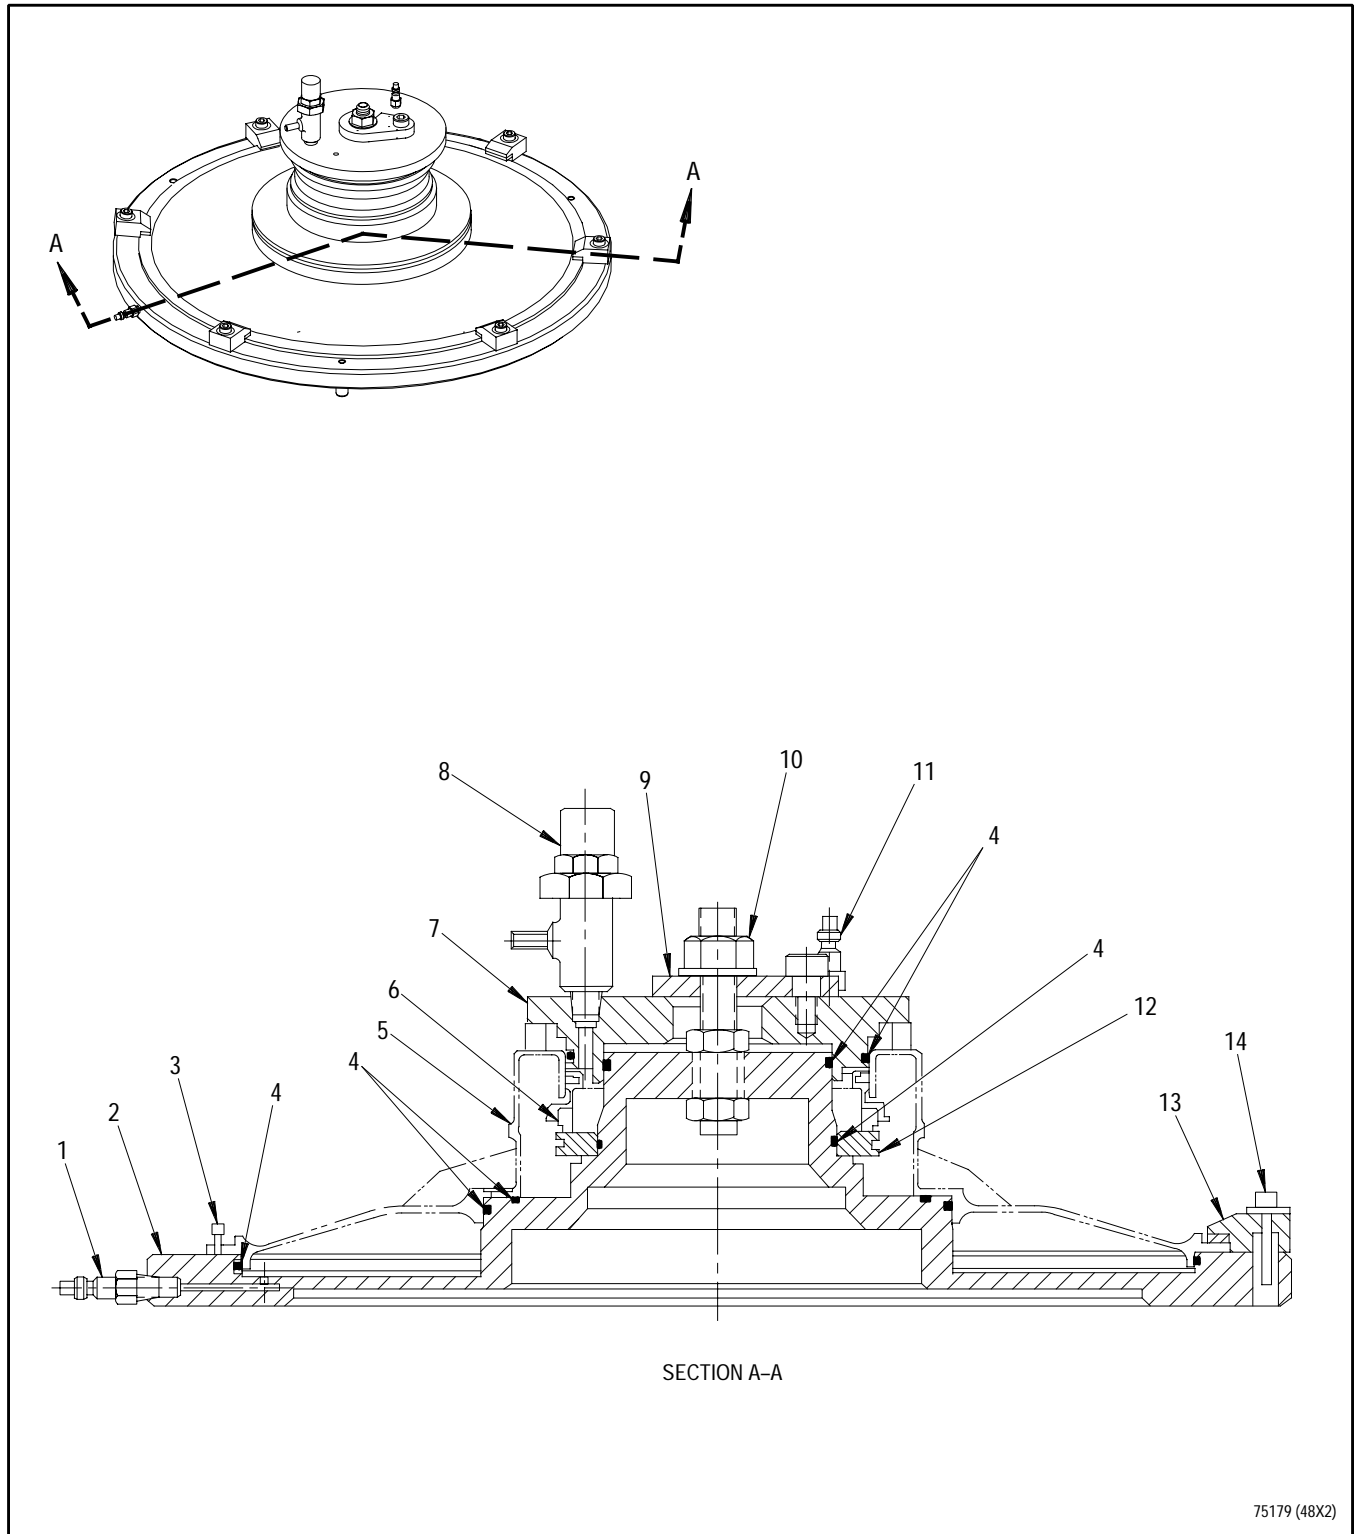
No. 2 Bearing Seal and Support Assembly Installed in PWA 57827 Fixture
